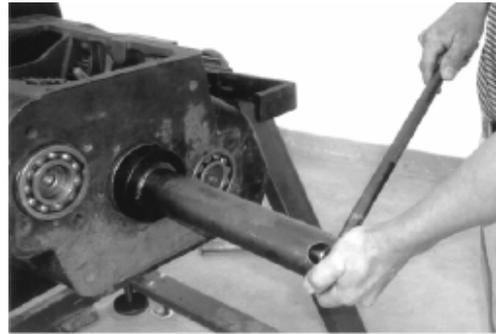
Remove The Front Bearing of Countershaft of Primary Transmission by Using Extractor
